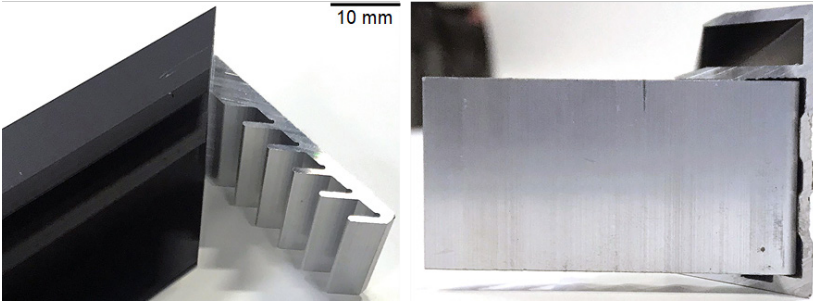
Preassembled frame corner connector pressed in the short side of the frame in diagonal view (*left*) and side view of the miter cut (*right*).
